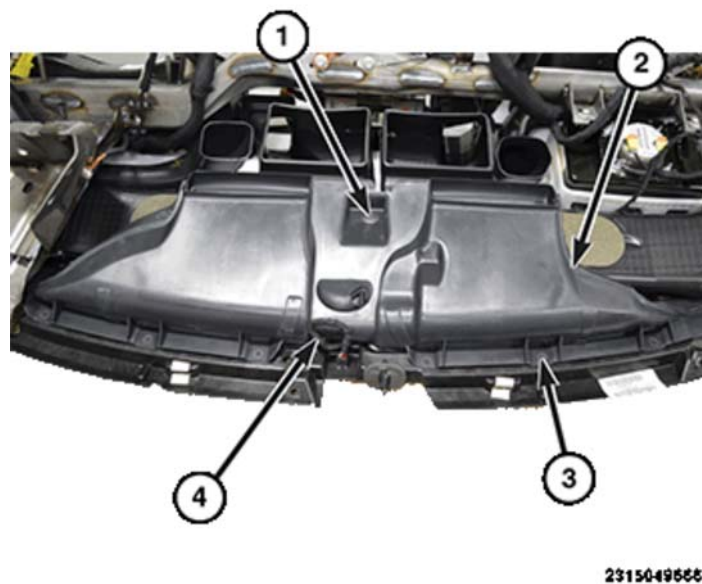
Fastener, Wire Harness, Defroster Duct & Screws
